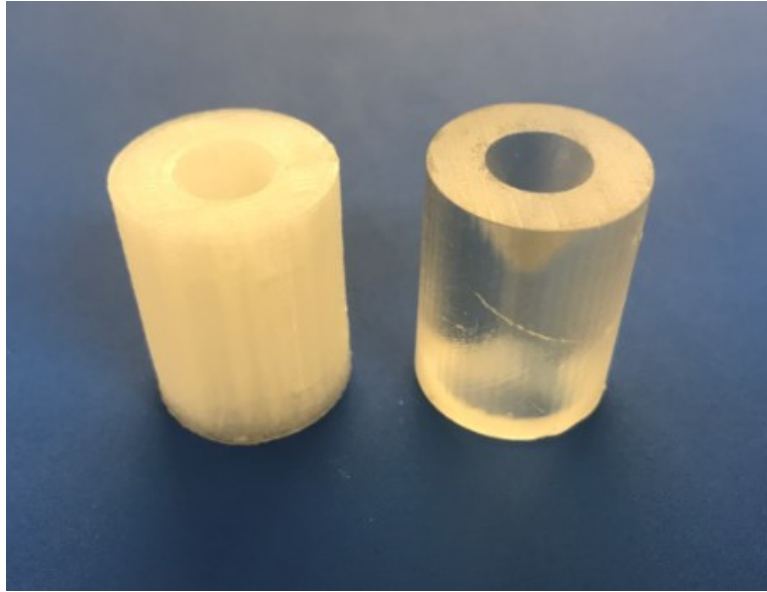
Tube product printed by using the direct ink writing (left) and SLA (right).
